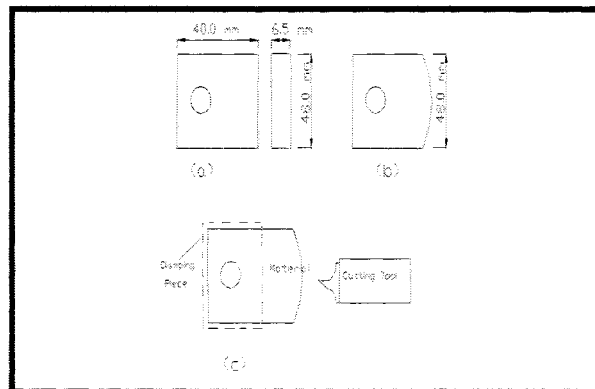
, (a) Test material (b) Test material after machining (c) Cutting set-up
